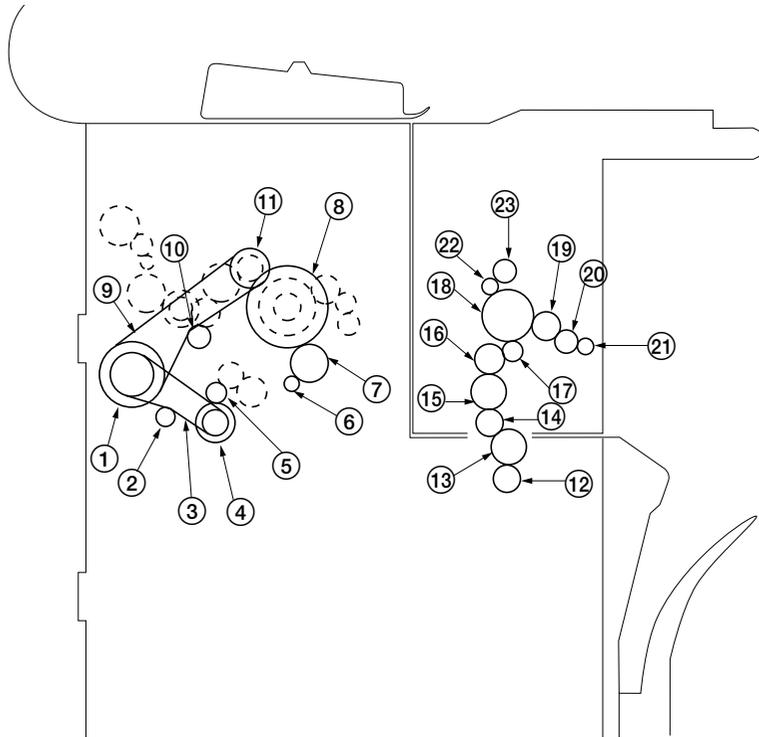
Drive system 3 (outer side to the left frame)
